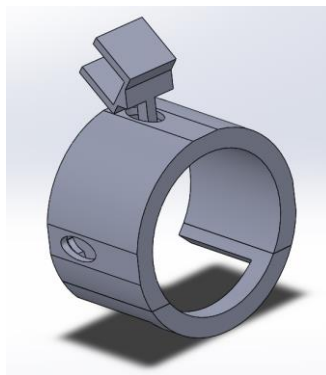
The drill mount and camera mount (design 2) lock to form a cohesive part able to sturdily hold the camera during the course of dental restoration.
